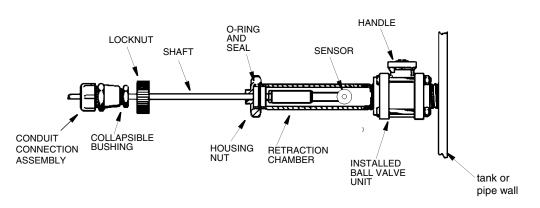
Ball Valve Assembly Shaft Installation and Removal
